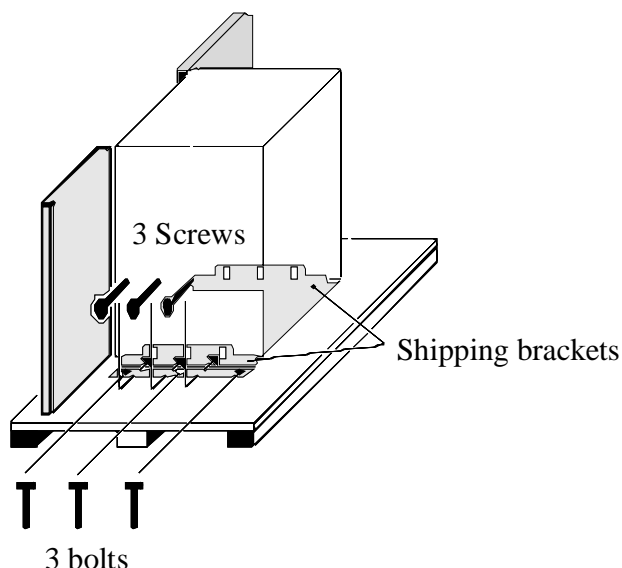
CDA 7 5330, Removing the Shipping Brackets
